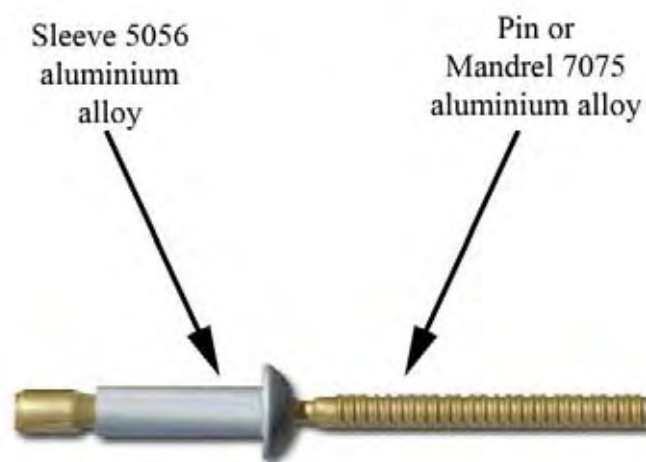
New aluminium alloy rivets replacing existing steel rivets [Appendix M].
